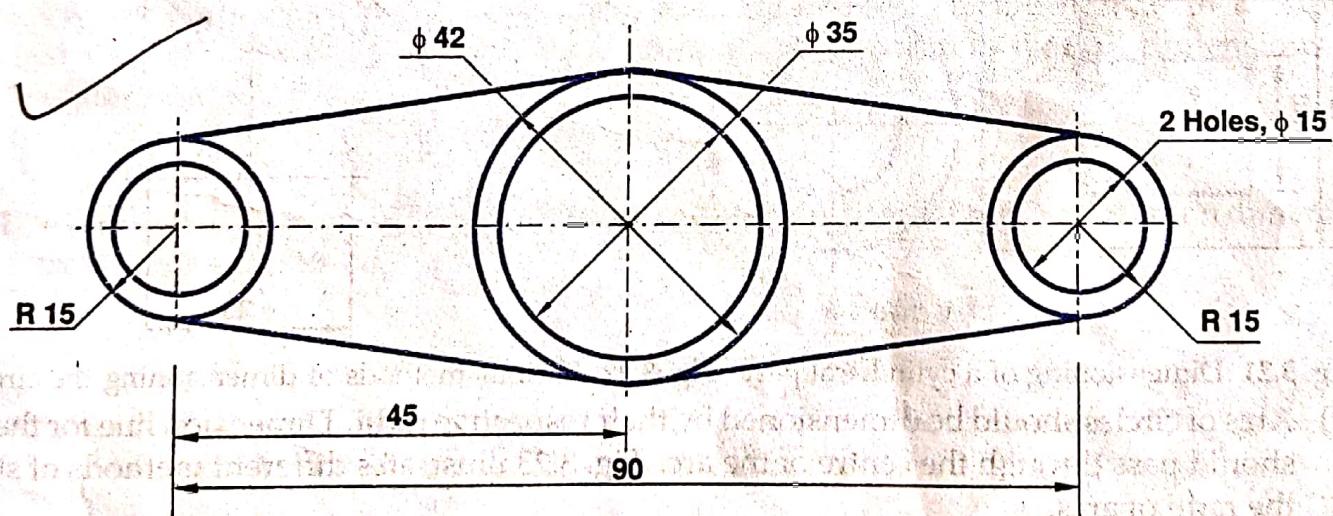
Dimensioning should be marked from the centre of a hole
